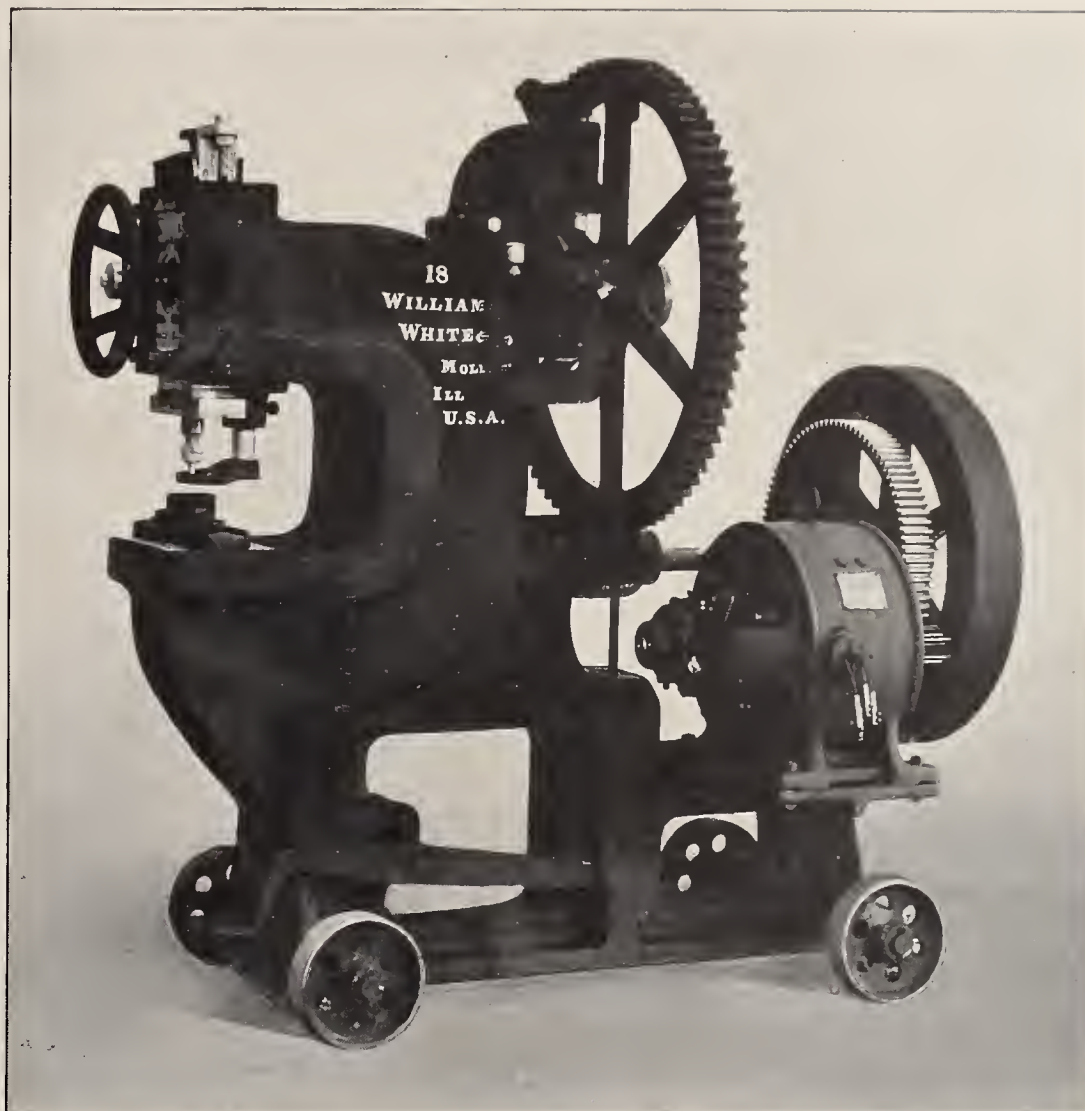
A MOTOR-DRIVEN PORTABLE PUNCHING MACHINE BUILT BY MESSRS. WILLIAMS, WHITE & COMPANY, MOLINE, ILL. SEE PAGE 241
